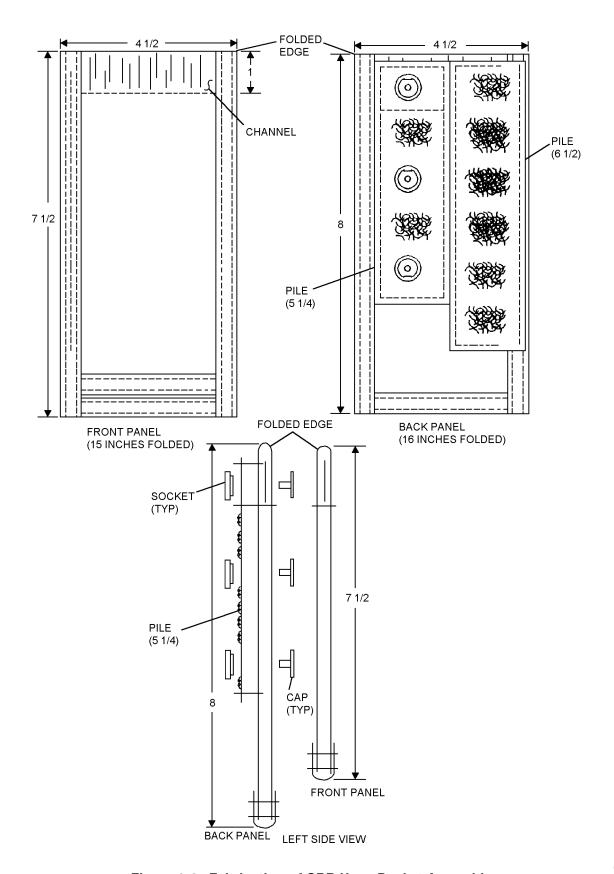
Fabrication of CBR Hose Pocket Assembly
